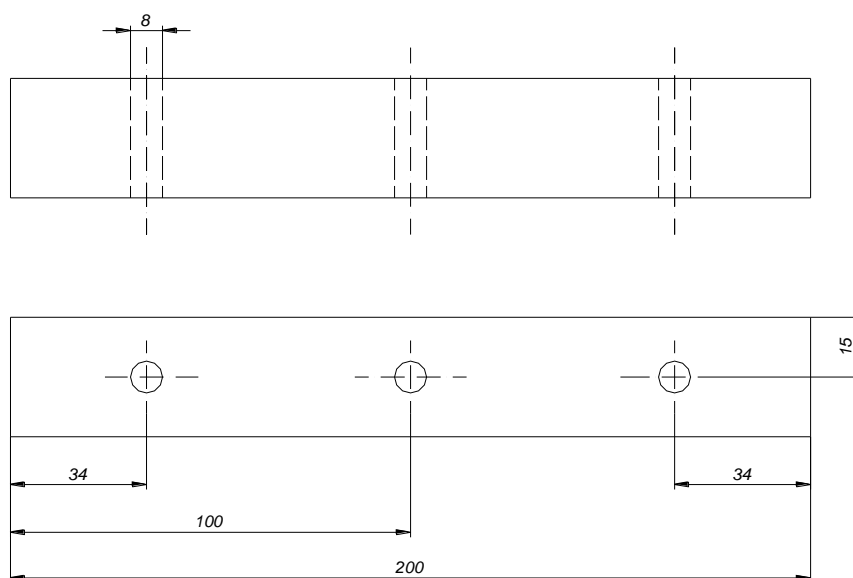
Specimen (base) for welding the dowels perpendicular to the grain
